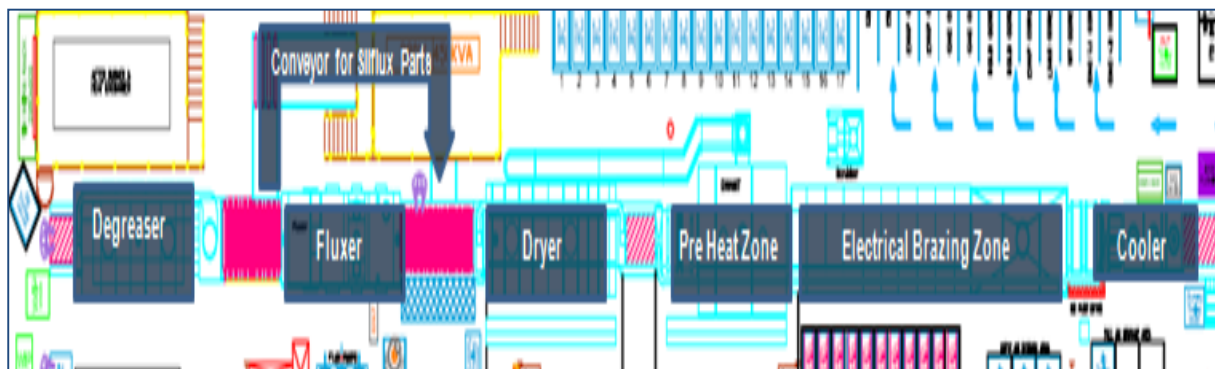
Bird's-eye view of the Heating machine with different Zones
